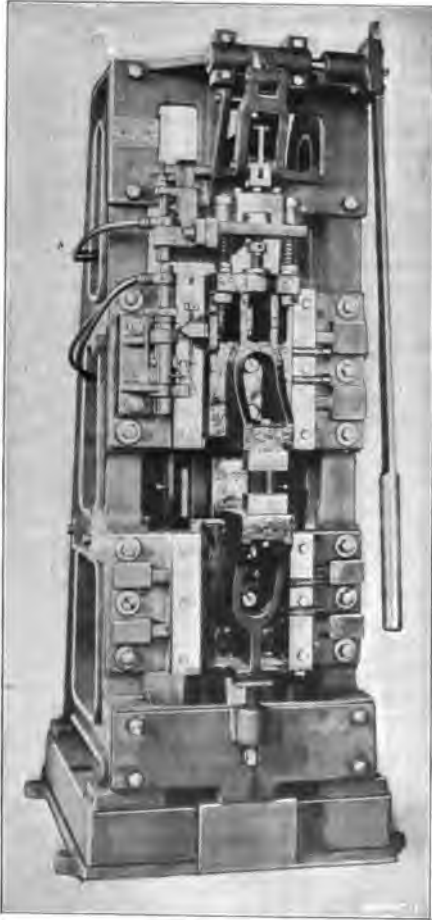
Type of Electric Welding Machine for Heavy Work
